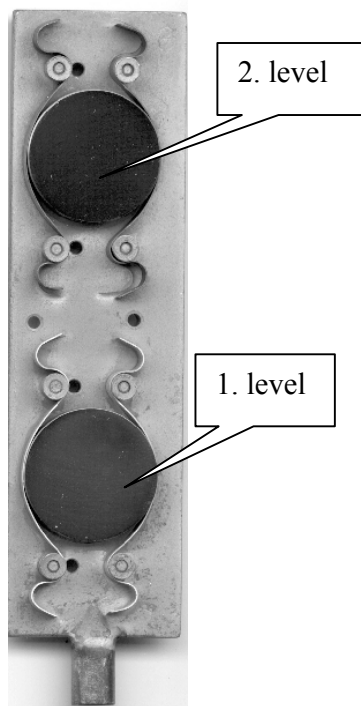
Lower substrate holder with clamps and mounting levels 1 and 2
